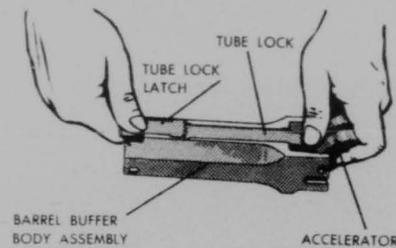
Removing Barrel Buffer Tube Lock Assembly.
